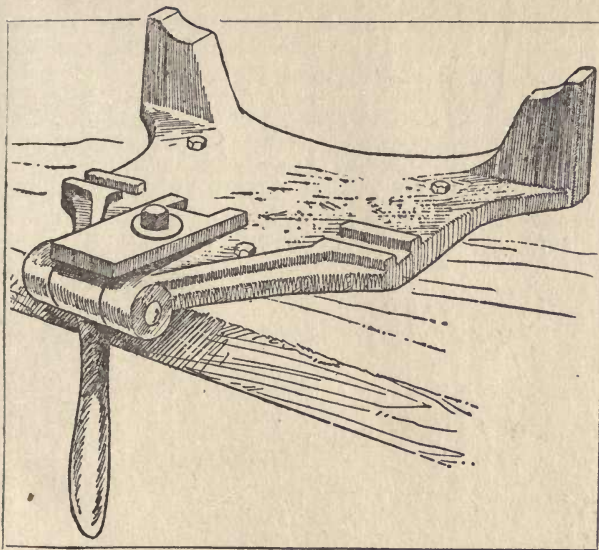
Cylinder block stand for bolting to the bench. This holds the block in a horizontal position for work on the bearings, pistons, etc. The handle operates an eccentric cam which locks the block to the stand
